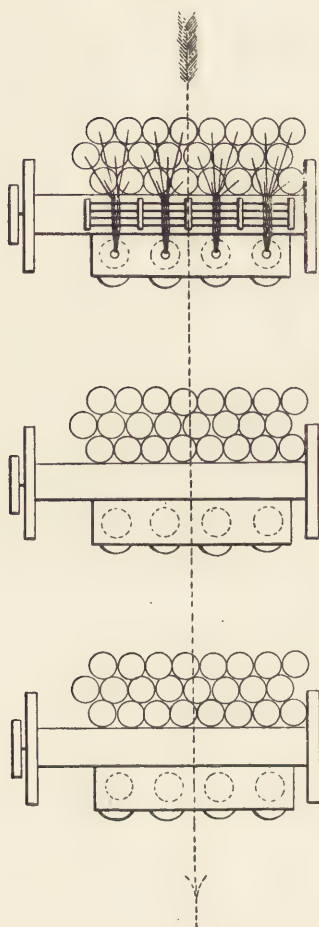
PLAN OF DRAWING FRAMES SHOWING POSITION OF CANS WITH STRAIGHT HEADS.
